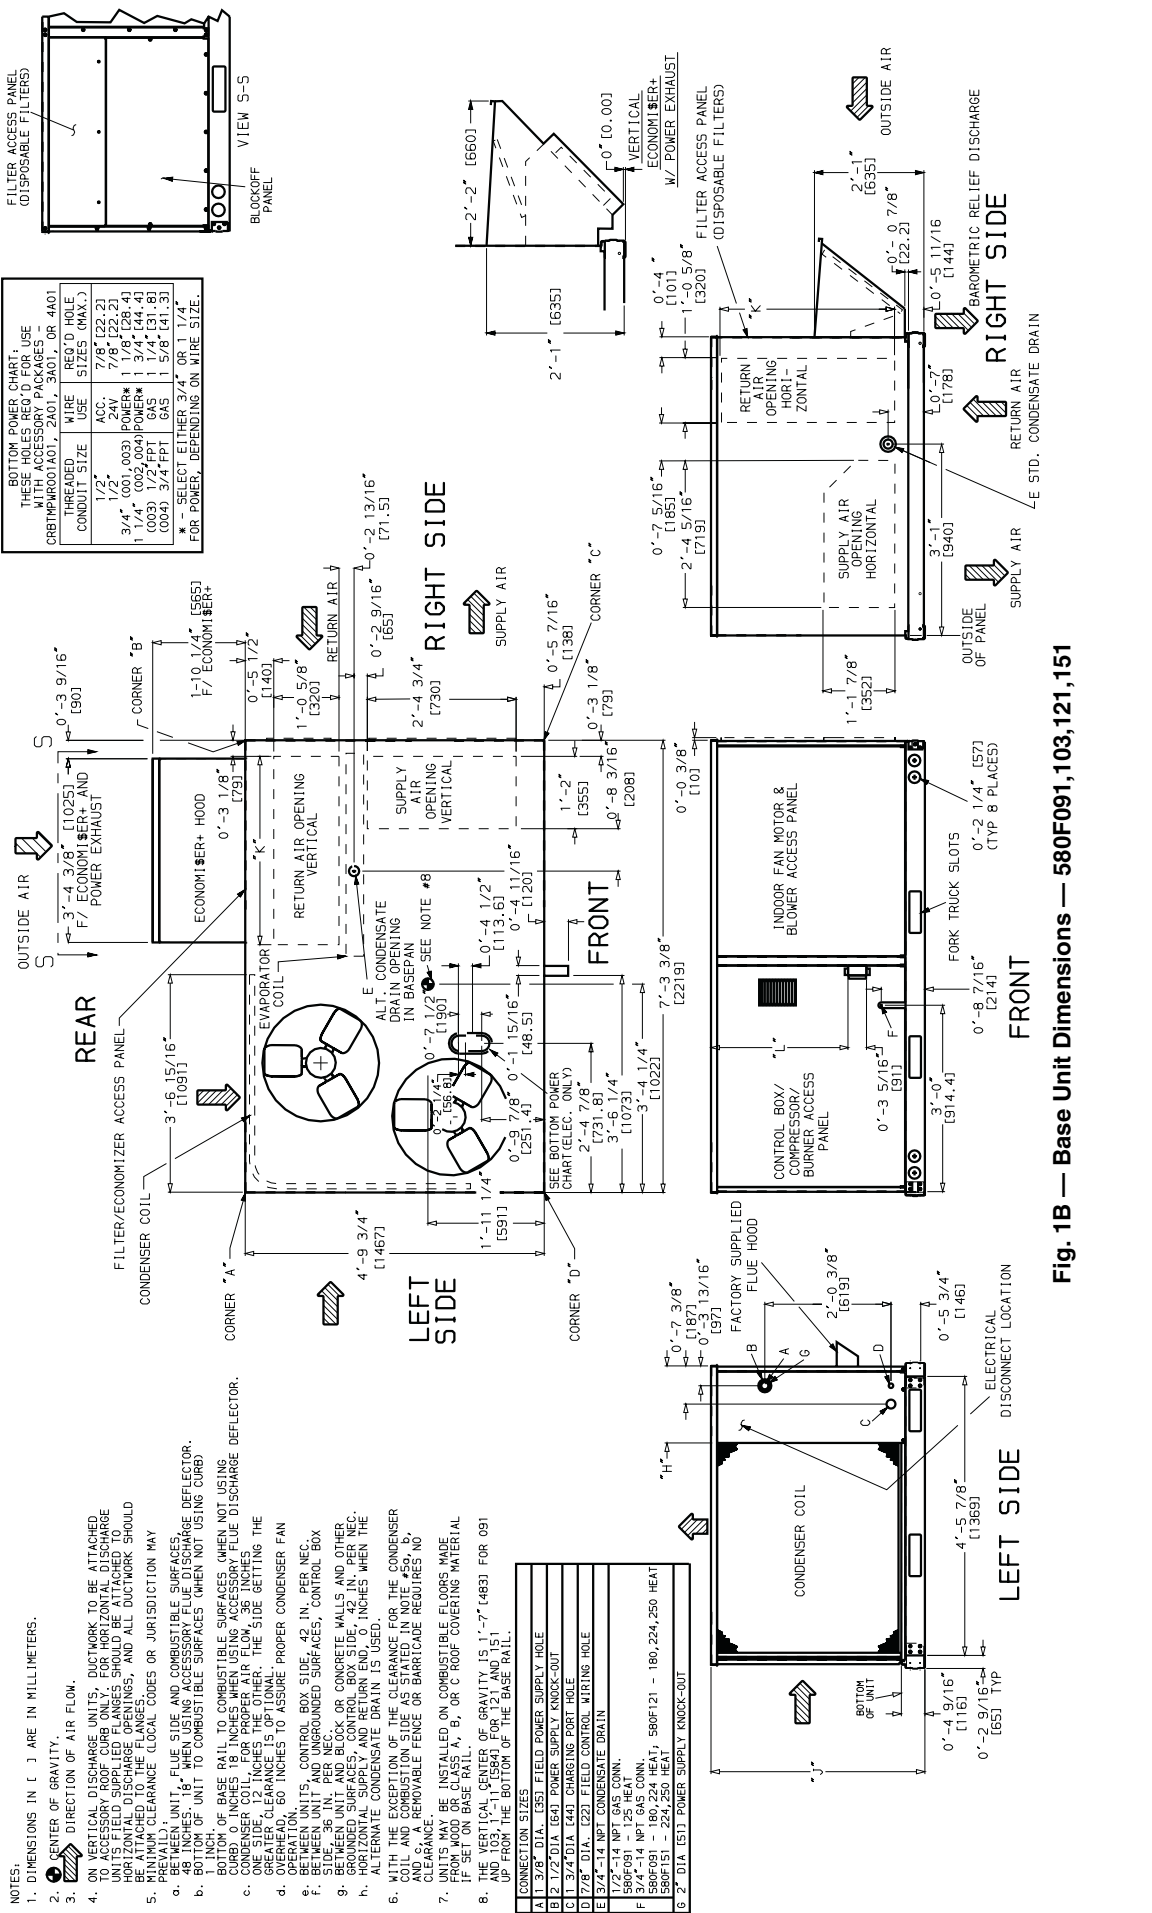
B — Base Unit Dimensions — 580F091, 103, 121, 151
